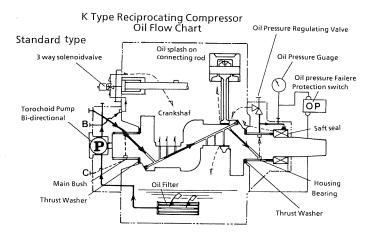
A Lubricating Oil Flow Diagram (Standard)
